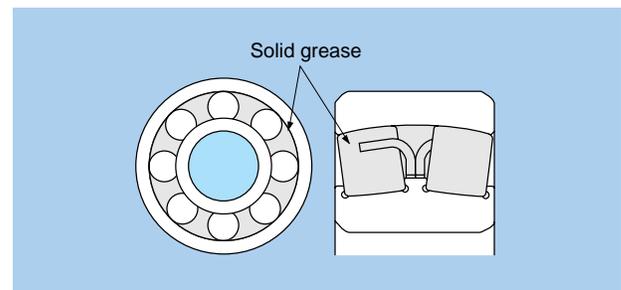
Spherical roller bearing with full-pack solid grease (Standard for spherical roller bearings)
